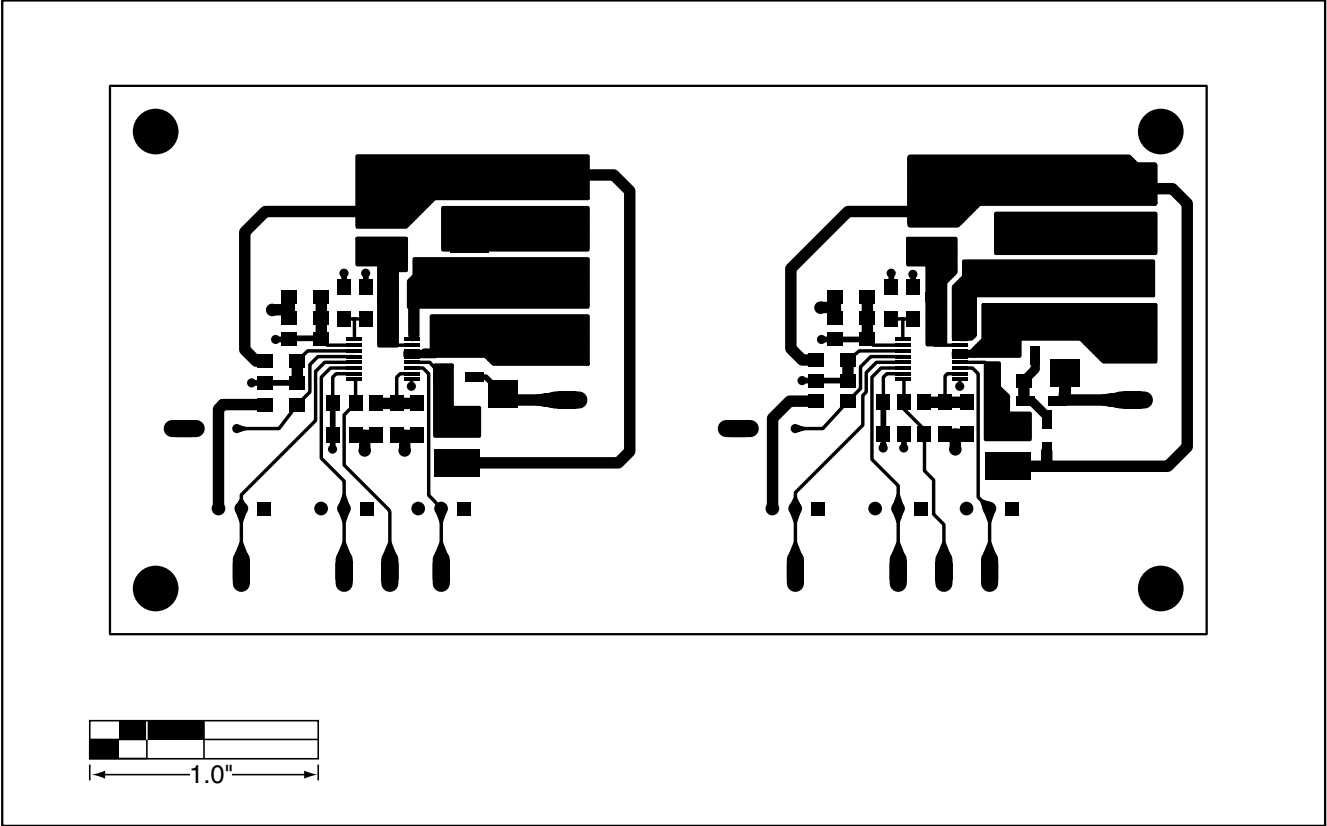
MAX1677 EV Kit PC Board Layout—Component Side
